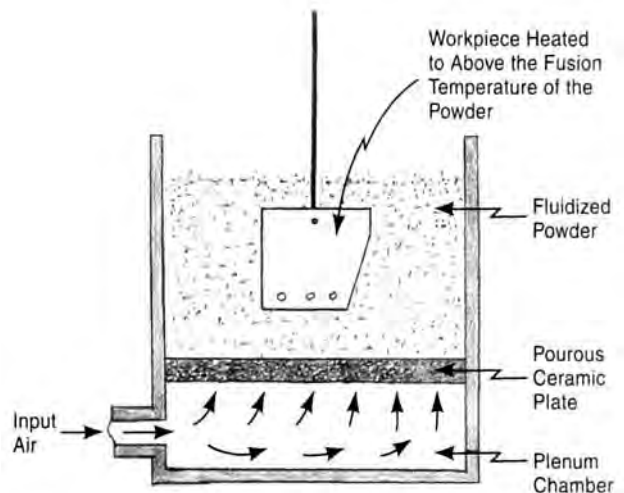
D8b A typical fluidized bed arrangement for powder coating workpieces.
